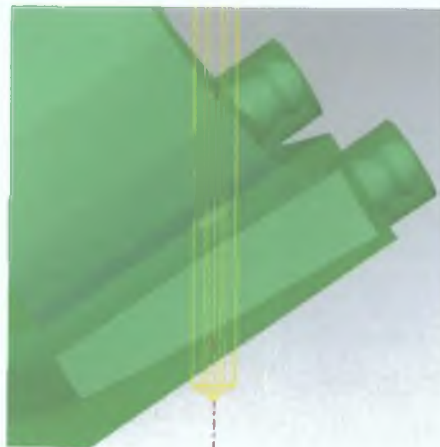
Drill Sequence ProEngineer Tool Path.
